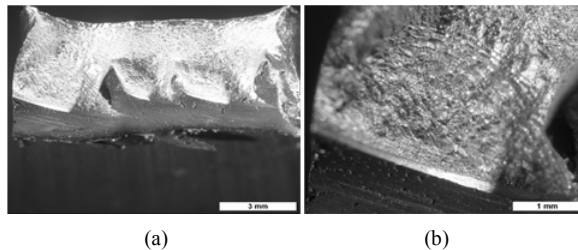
Fracture surface of specimens: (a) 10⁴ cycles failure; (b) 10⁵ cycles failure.
